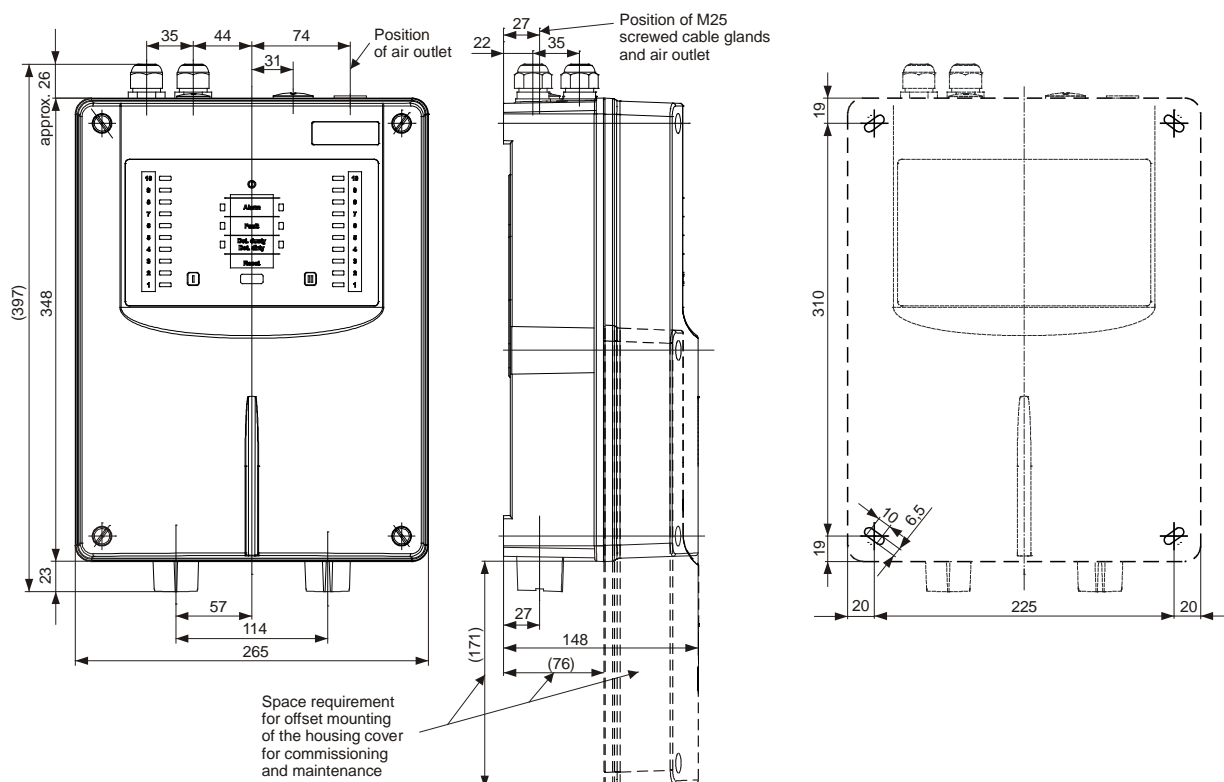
Dimensioned drawing, ASD 535 detector housing drilling plan
